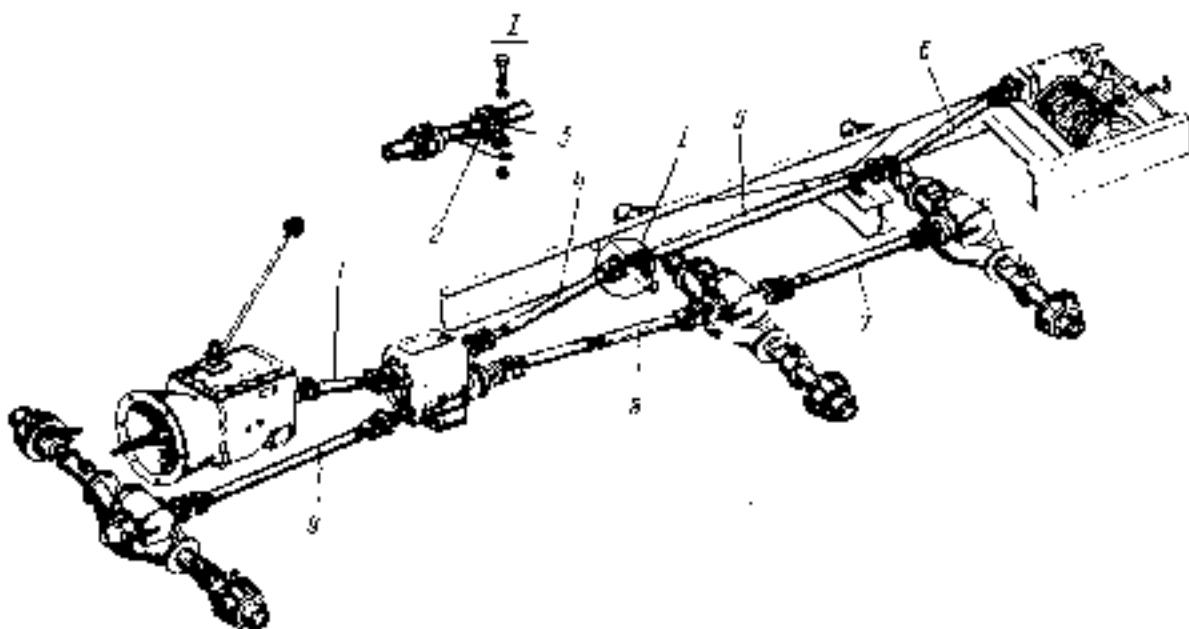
Layout Diagram of Transmission and Winch Drive Propeller Shafts for Quadrigator 02 Trunk
